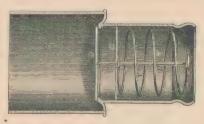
, Section of Valve and Valve Seat, J, Fig. 105. This section represents the full size. A A, Coiled Spring, one end attached to Shaft B, the other bearing against the narrow Bar D, through which B moves freely, yet preventing lateral misplacement of the Valve C.
